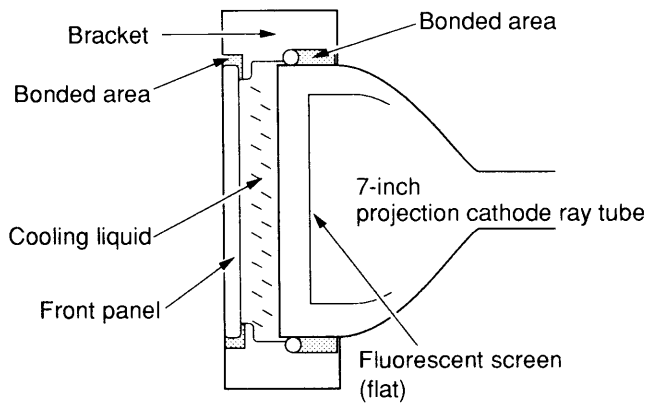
Air coupling and liquid cooling system projection cathode ray tube
